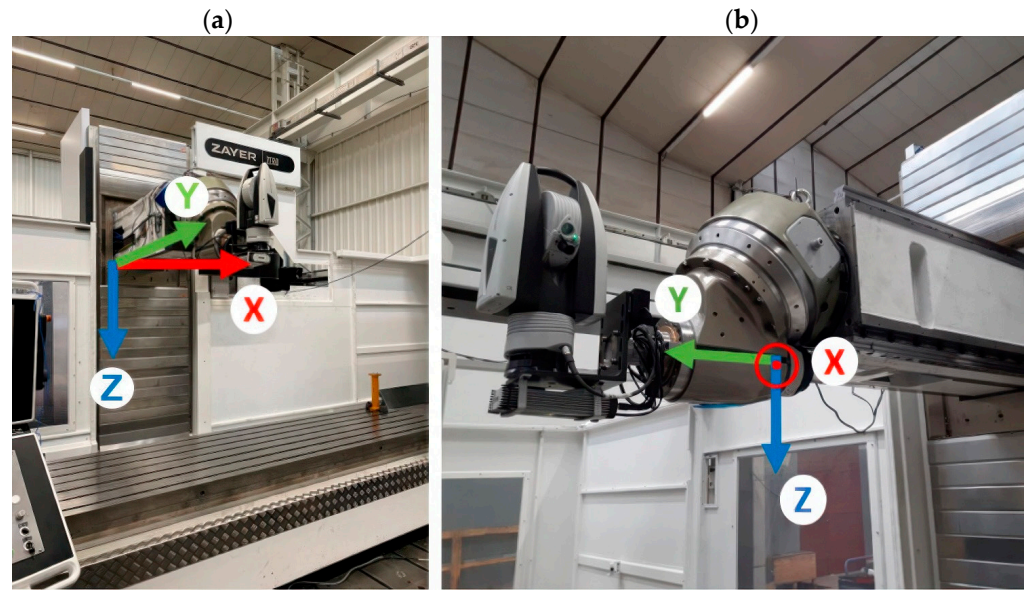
ZERO™ machine test details: (a) reference system and (b) detail of the laser tracker attached to the tool holder.
